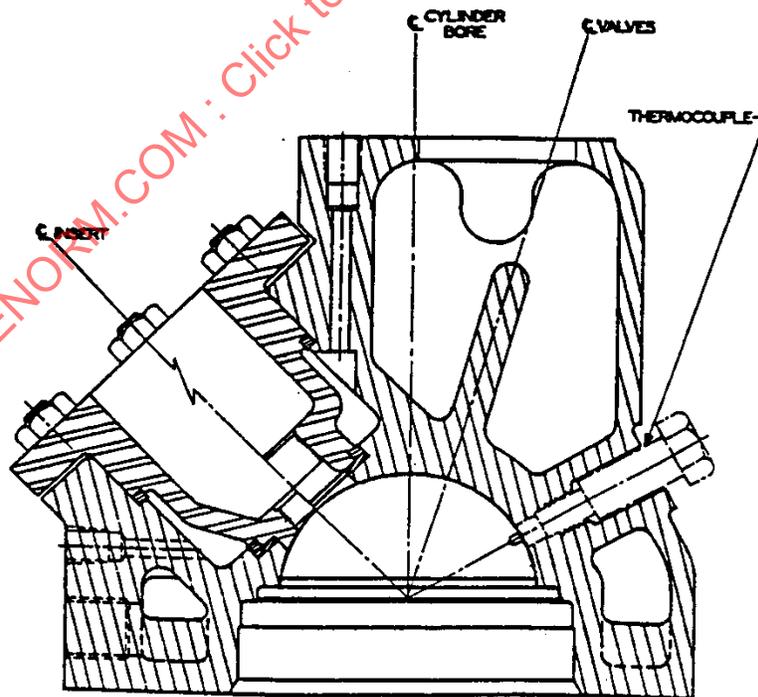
INSERT TYPE HEAD (PART # 16001)
